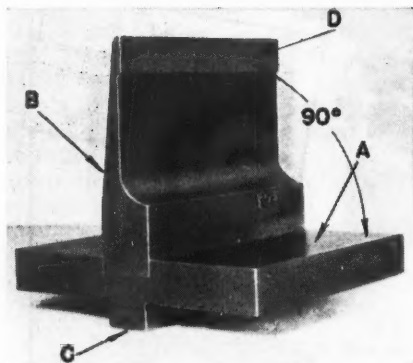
Illustration of a Device for Use in Centering Milling Machine Cutters
